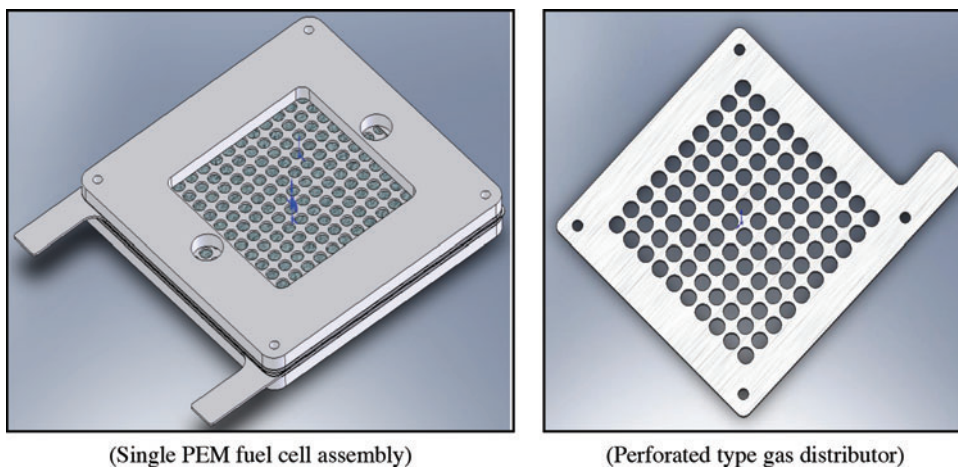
3D CAD model of PEM fuel cell with stainless steel made perforated type gas distributor.
